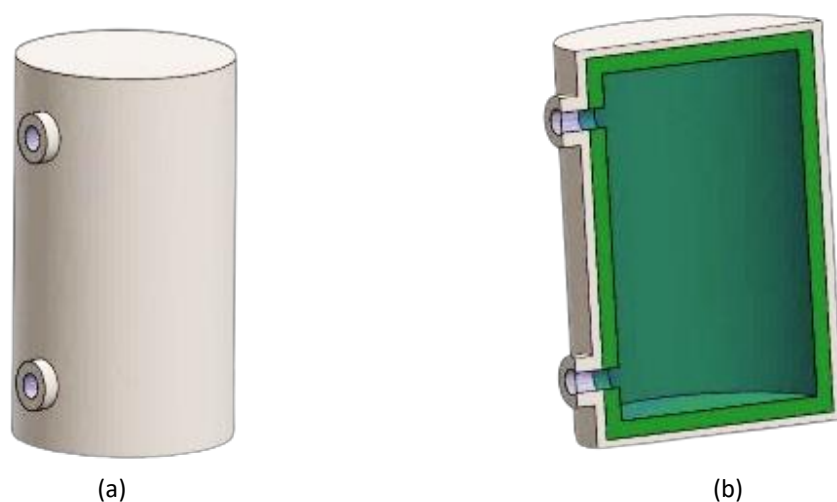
Design of Stratified storage tank (a) Full tank (b) Half-view
